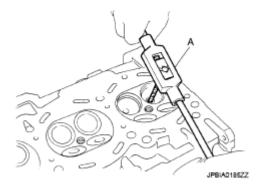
Reaming Cylinder Head Valve Guide Hole Using Valve Guide Reamer (EXH) Courtesy of NISSAN MOTOR CO., U.S.A.
